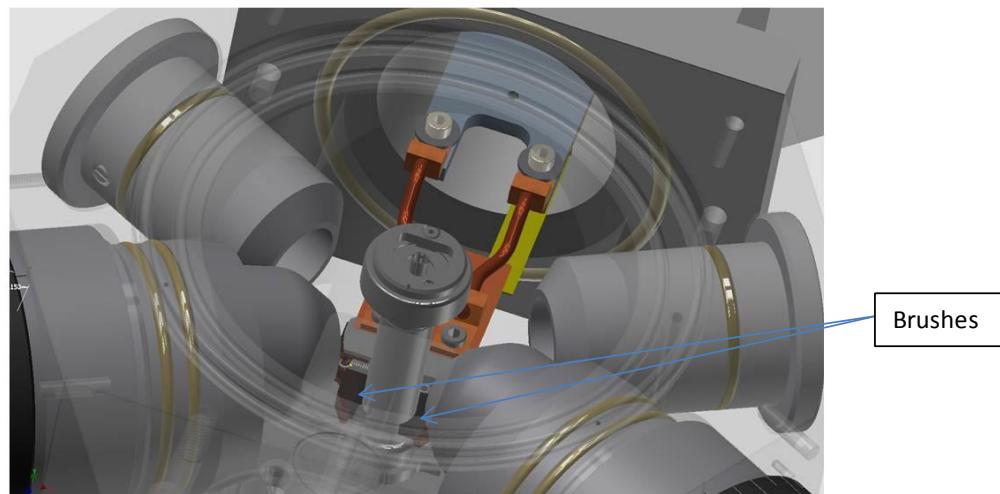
Interior chamber showing the cold conductor with new brushes.
